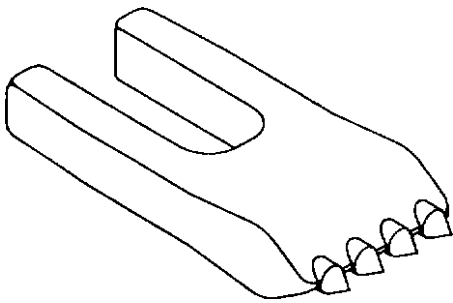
TX-50 series ("Bear Claw") Type Tooth
